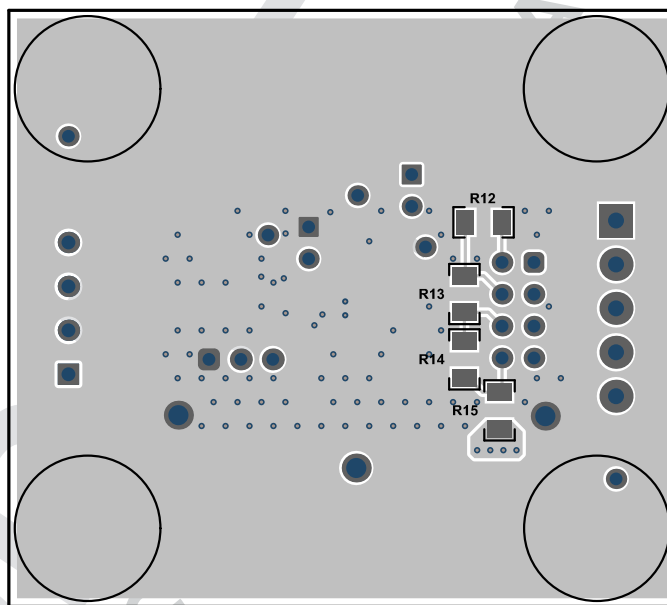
BQ2969 Two-Layer Board Layout - Bottom Layer
